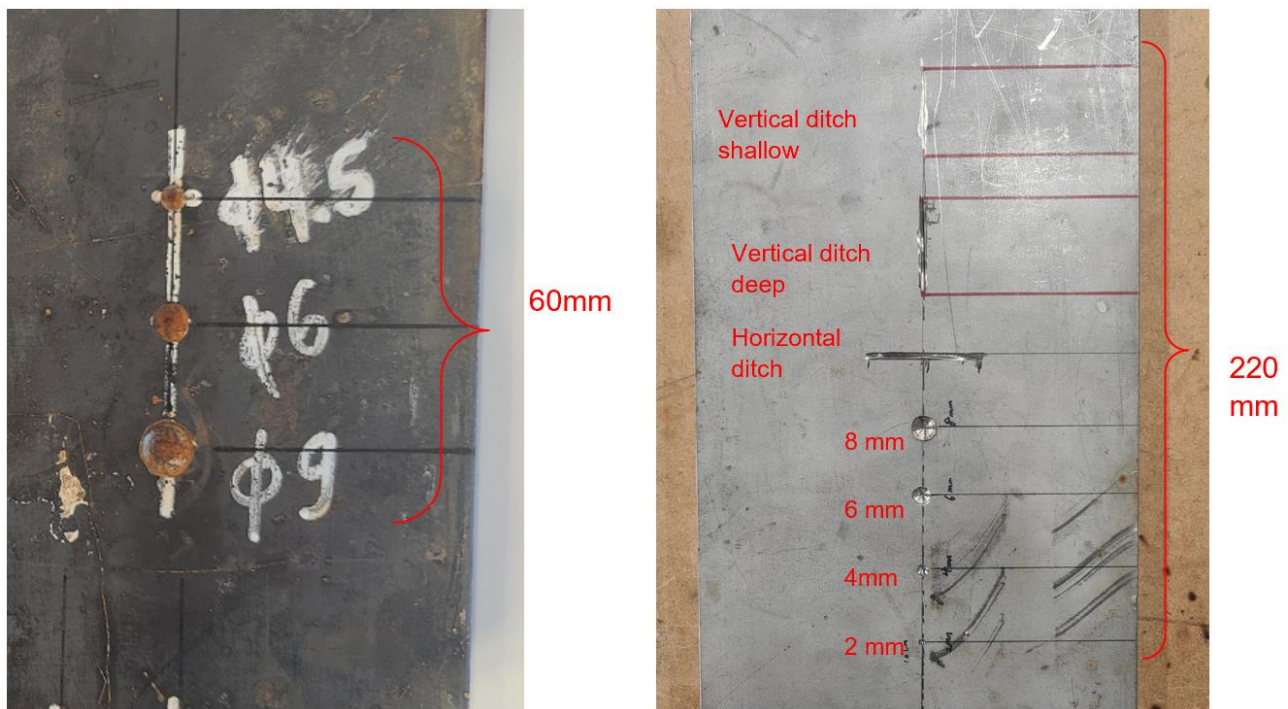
Plate tests; Left: Plate No.1 with three defects, Right: Plate No.2 with seven defects
